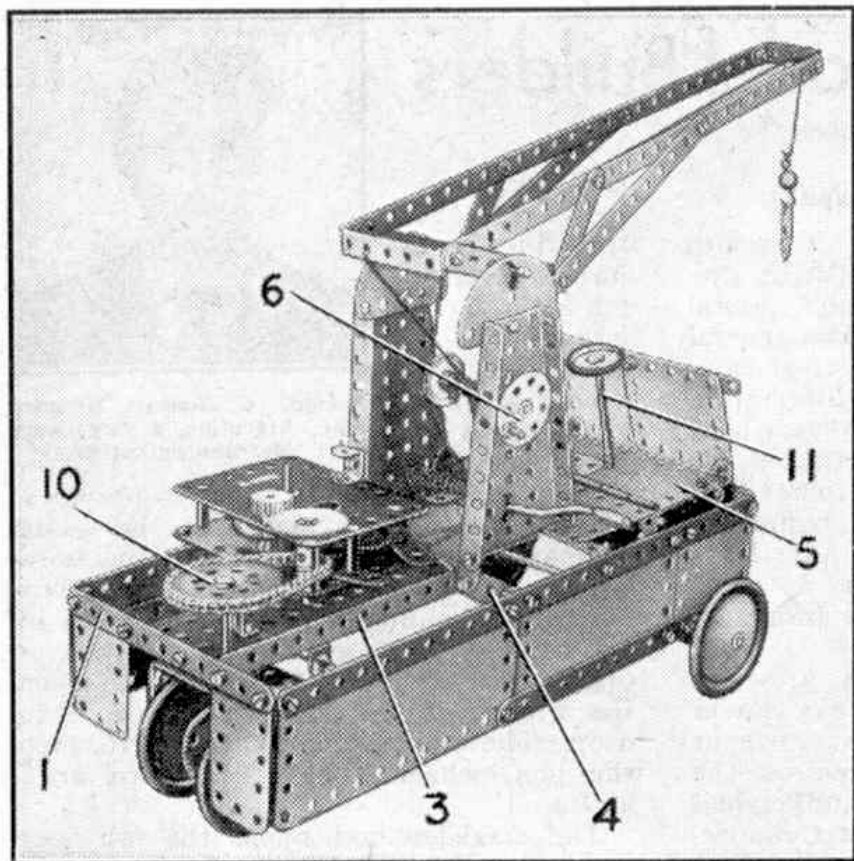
The mobile crane is driven by a No. 1 Clockwork Motor, which is mounted as shown here.
